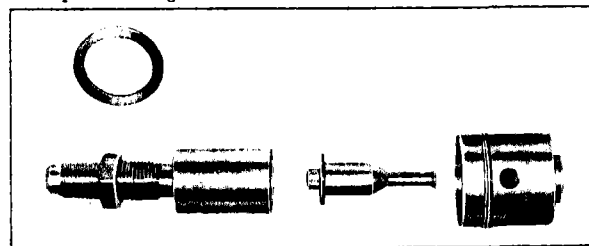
REPAIR KIT — PISTON VALVE INTERNALS
